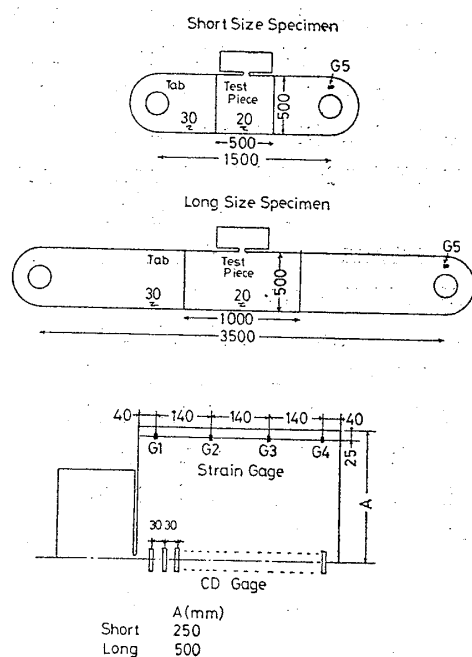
Specimen configuration and arrangement of crack detector gages and strain gages
